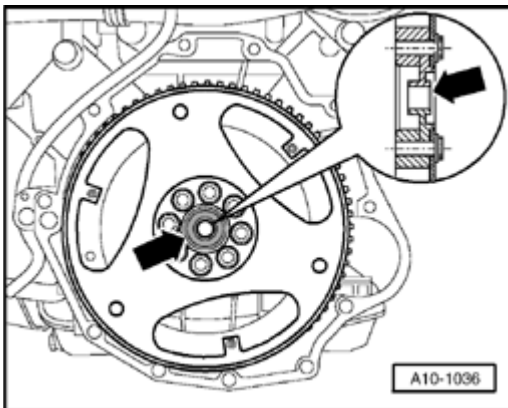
Installing Drive Plate With Centering Washer And Backing Plate
